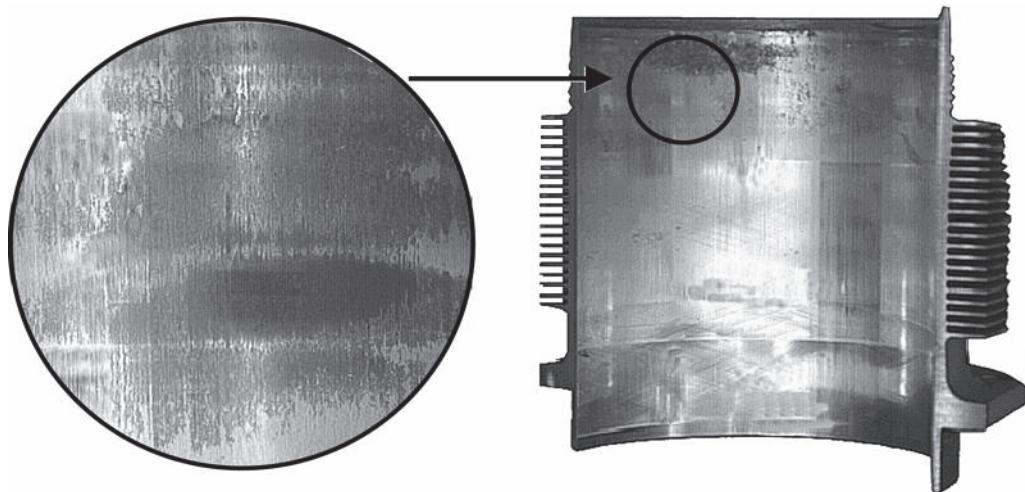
Cylinder Barrel Scoring and Piston Rub
